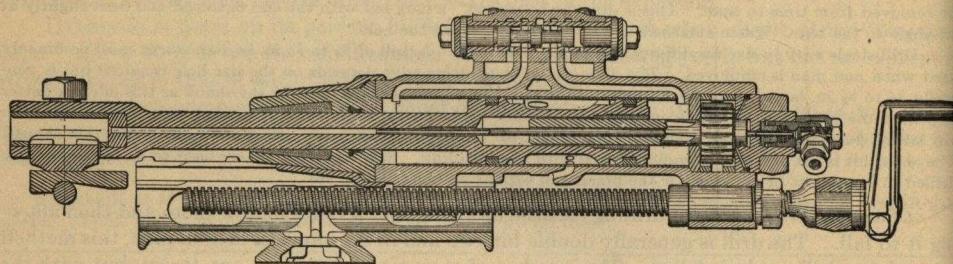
Sullivan “Liteweight” rock drill, Sullivan Machinery Co., Chicago, Ill.
